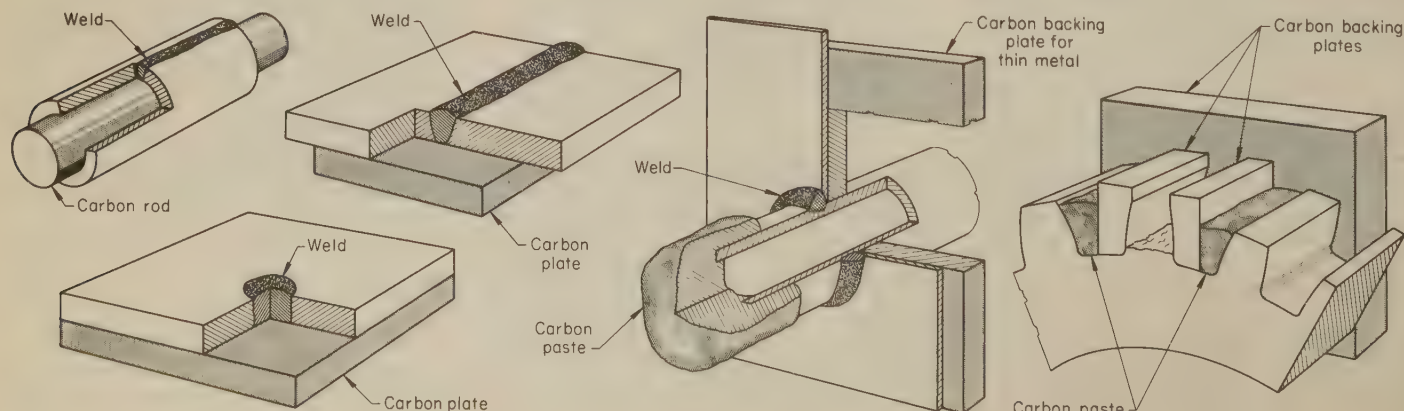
Carbon backing and support to expedite repair welding of surfaces and contours
